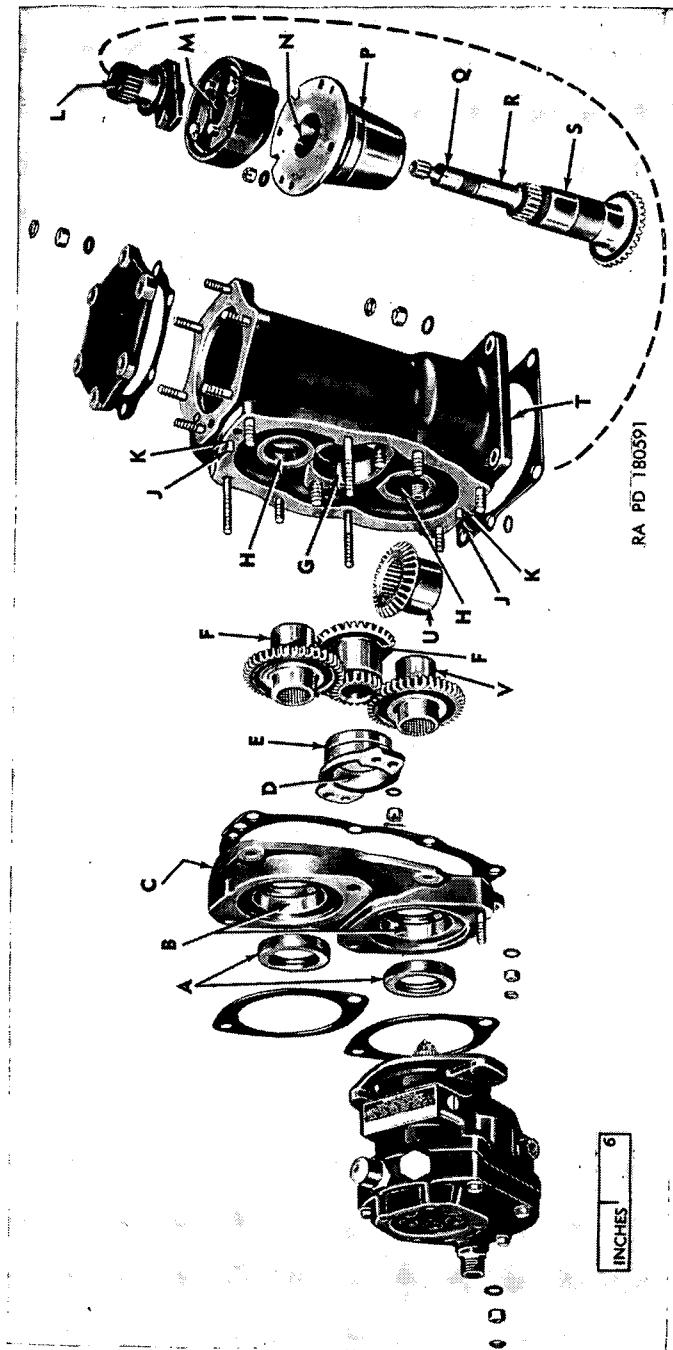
Repair and rebuild standard points of measurement for magneto drive housing assembly.
